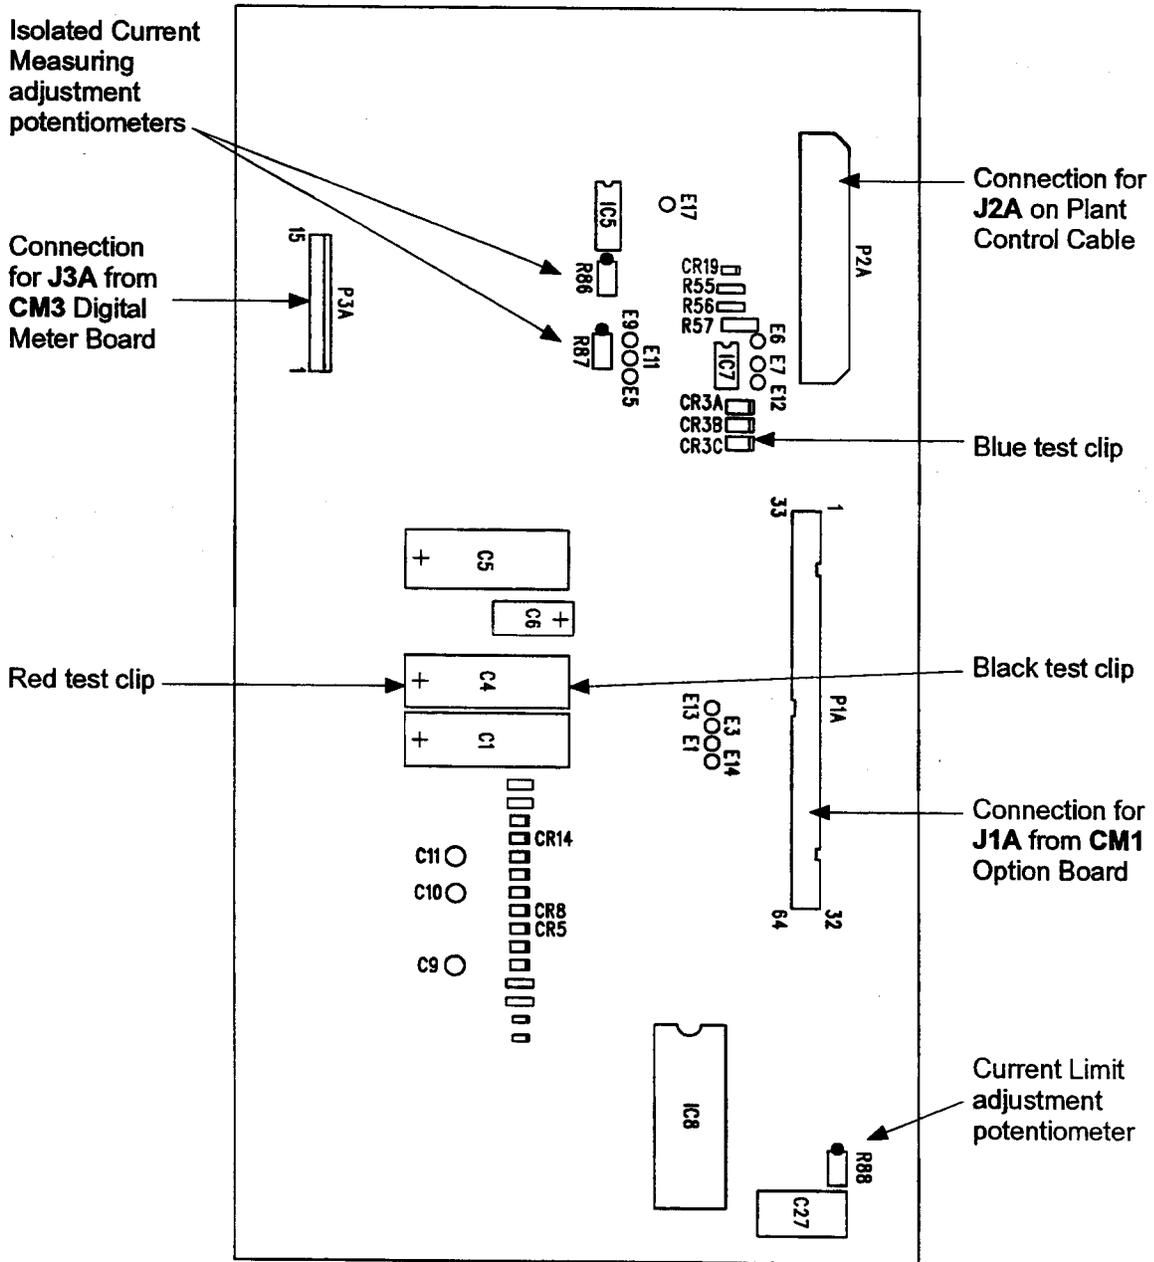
CM2 Control Board Showing Test Clip Connections and Other Component Details
